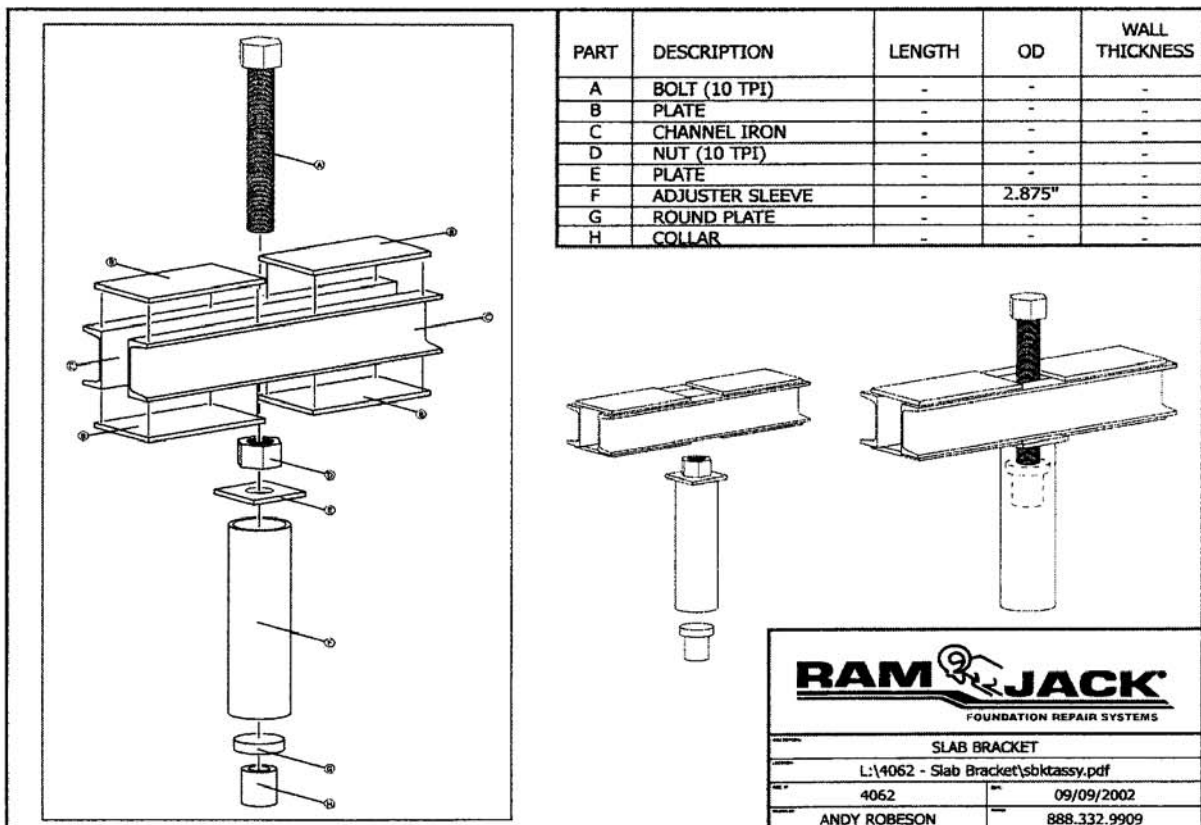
DETAIL OF THE SLAB BRACKET ASSEMBLY
